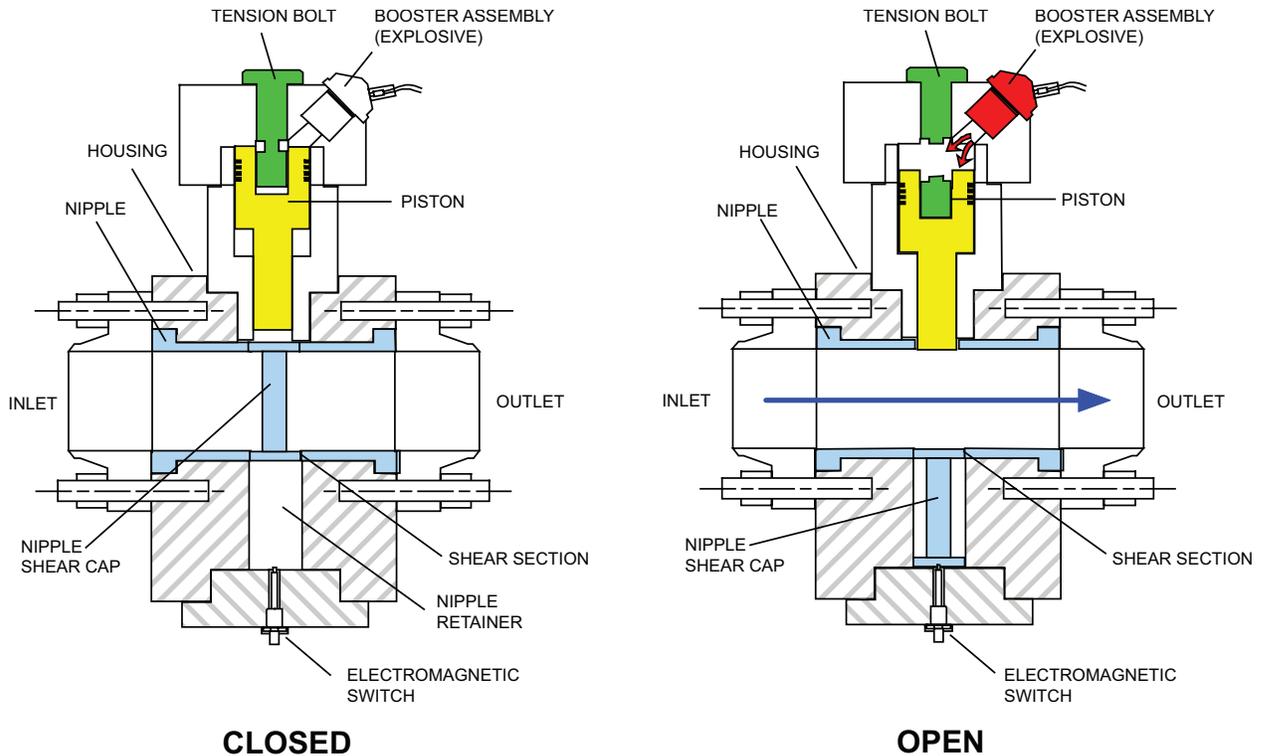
Gravity Driven Cooling System (GDCS) Squib Valve - conceptual design
